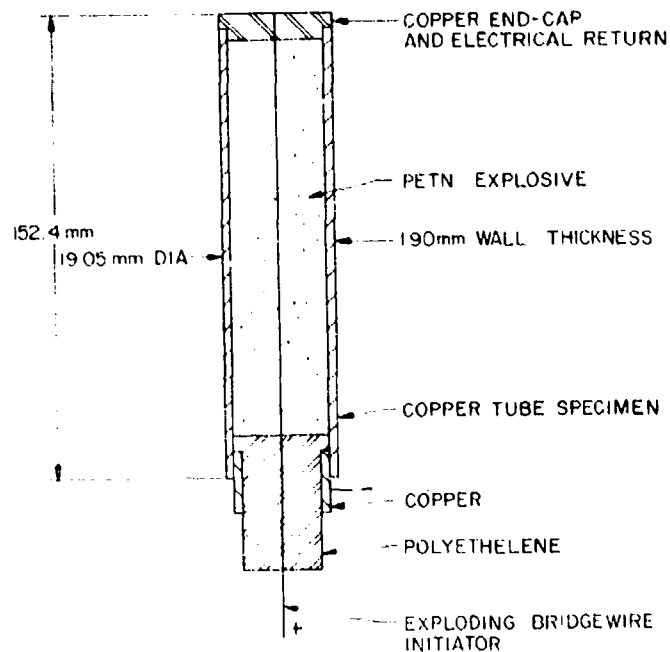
PETN Filled Tube Specimen Detonated by Exploding Bridgewire Specimen
